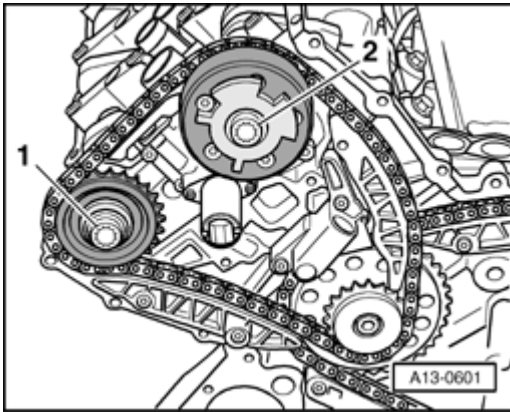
Removing/Installing Bolts For Camshaft Chain Sprocket Or Camshaft Adjuster Using Multipoint Socket T10035
